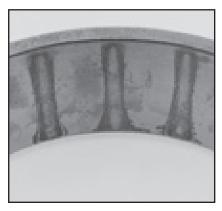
This cup has heavy corrosion on the race. This type of corrosion may only be a surface stain without pitting. If the staining can be cleaned with a fine emery cloth or crocus cloth, the bearing may be reused. If there are pits that cannot be cleaned with light polishing, the bearing should either be discarded or, if practical, refurbished.
